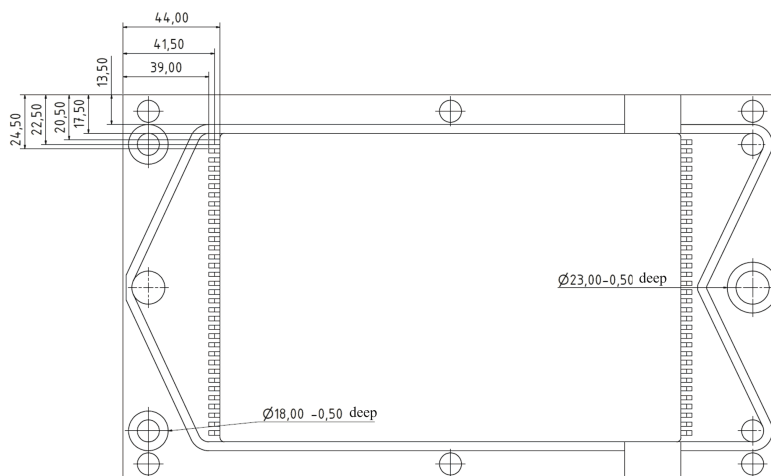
Dimensions of the bottom side of the manifolding frame: Bottom view of the manifolding frame. Flow homogenizers are visible at the inlet and outlet of the gas manifolding. All dimensions are in mm. Modified from (Todt 2011).
